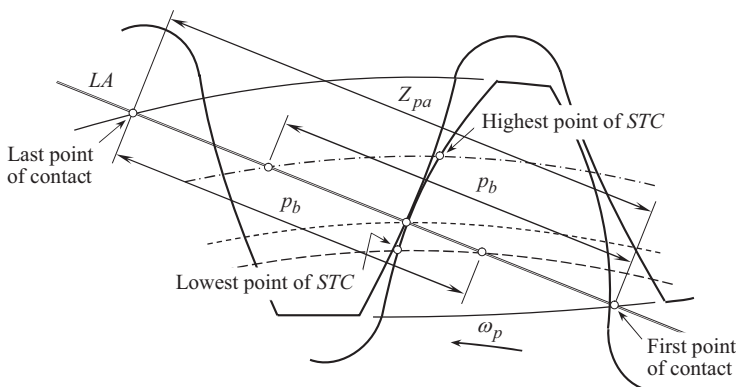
Definition of the highest and lowest points of single-tooth contact for involute gears.
